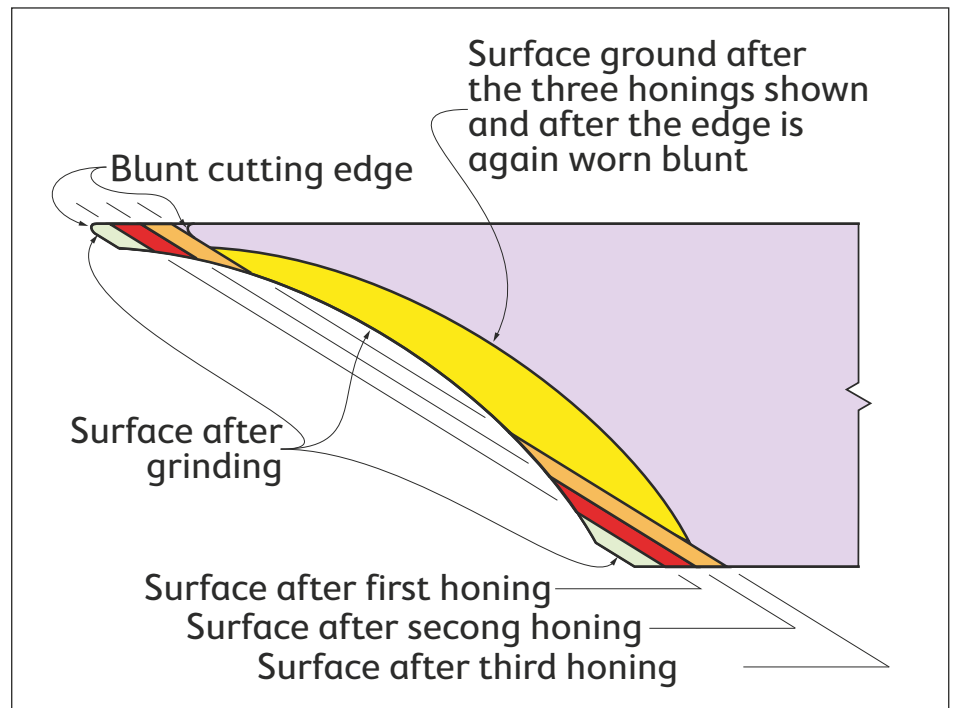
The optimum sharpening procedure for cutting tools with non-convex bevels. In some cuts, you sight along the cutting edge and the bevel heel to ensure the optimum tool presentation
